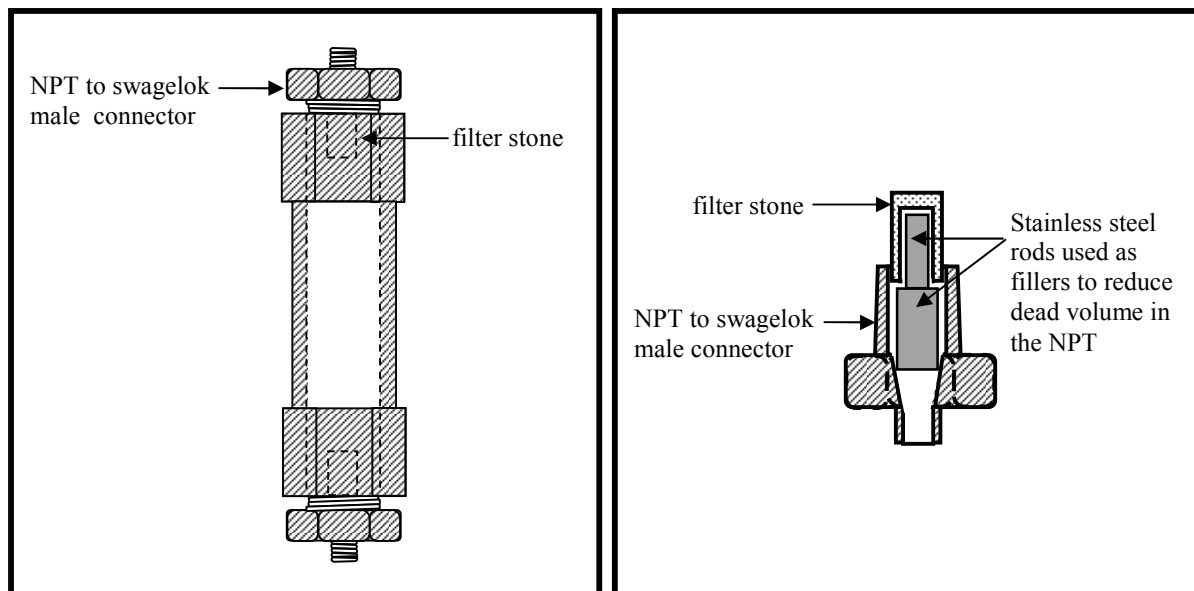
(a) Front view of equilibrium vessel (b) Cross section view of filter stone set-up
